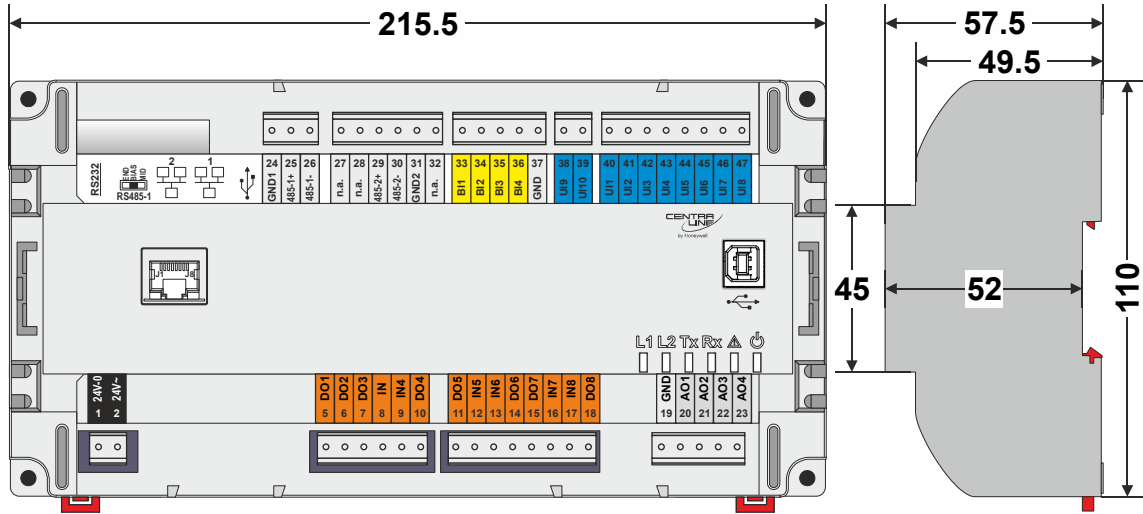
EAGLEHAWK NX controller (w/o HMI but with RJ45 socket for connection of portable HMI, and with full complement of onboard I/Os), dimensions (in mm)
